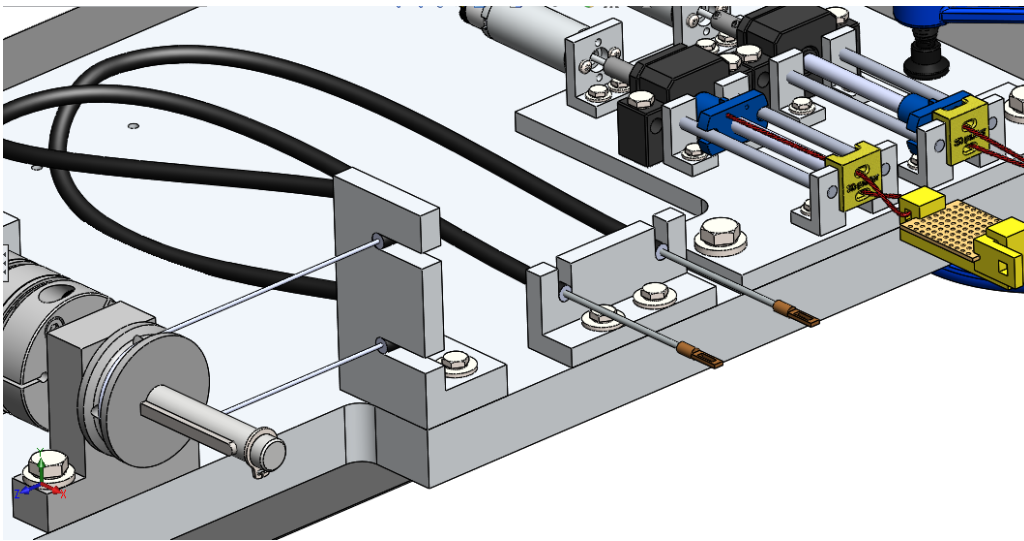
The two flanges assembled in the setup. Modified from [4].
